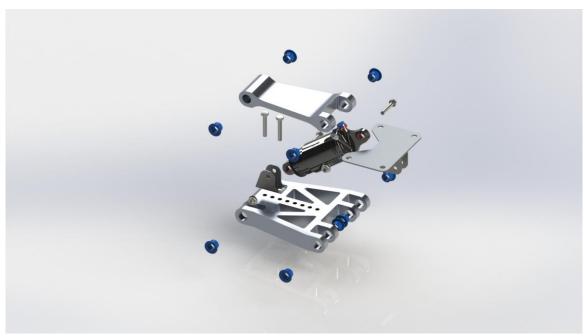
The suspension assembly, consisting of bearings, suspension arms, dampers, and damper hinges.
